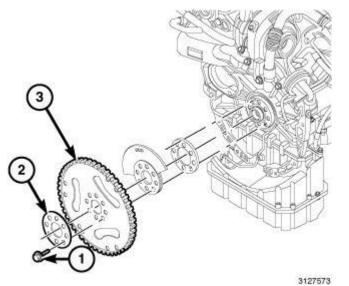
Flex Plate, Counter Weight, Tone Wheel & Bolts Courtesy of CHRYSLER GROUP, LLC
